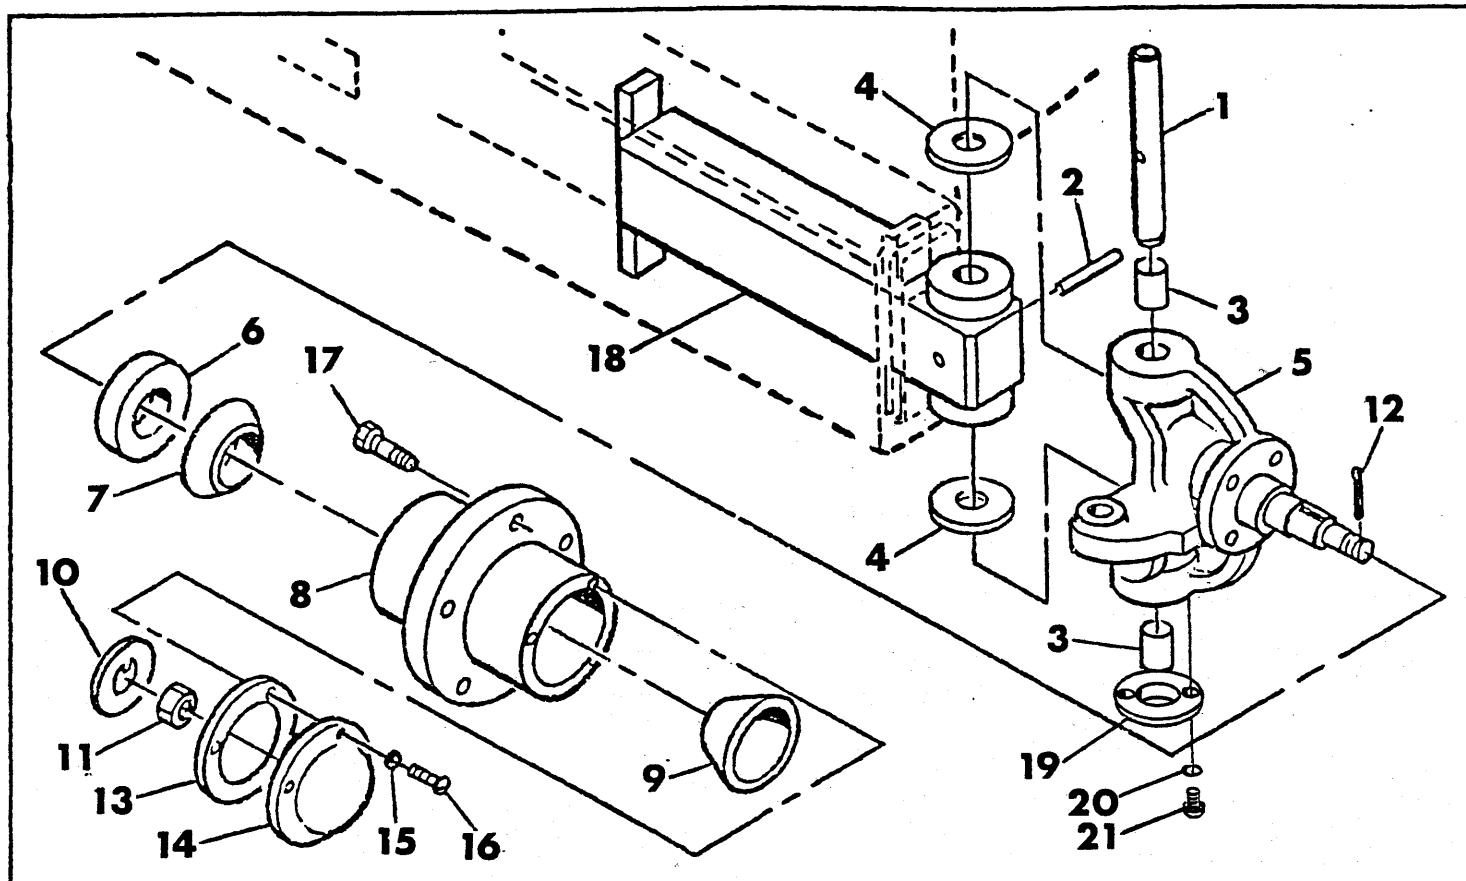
HUB, SPINDLE KNUCKLE AND STUB AXLE ASSEMBLY
